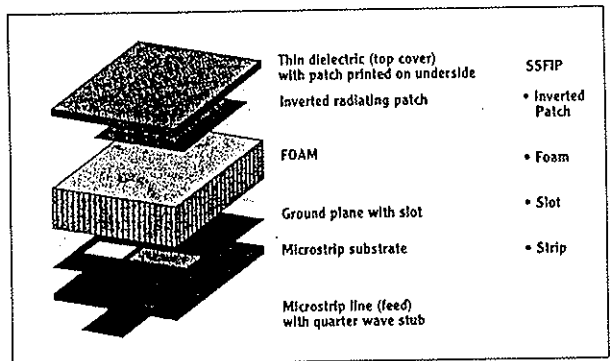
This exploded view of the Strip Slot Foam Inverted Patch technology shows how flat, narrow, and relatively small antennas can be manufactured using this technique.
